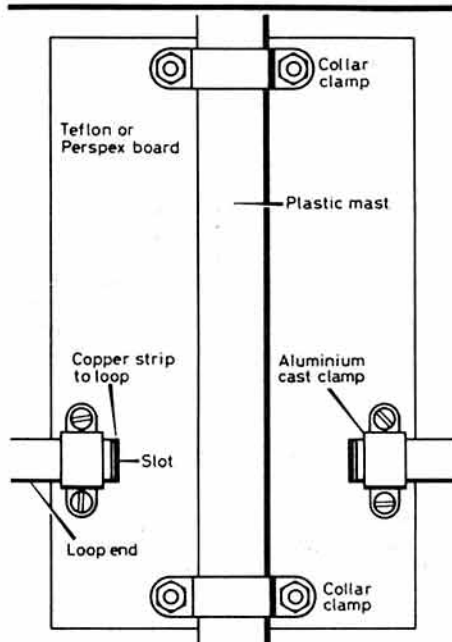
BACK VIEW OF THE TUNING BOARD SHOWING MOUNTINGS
